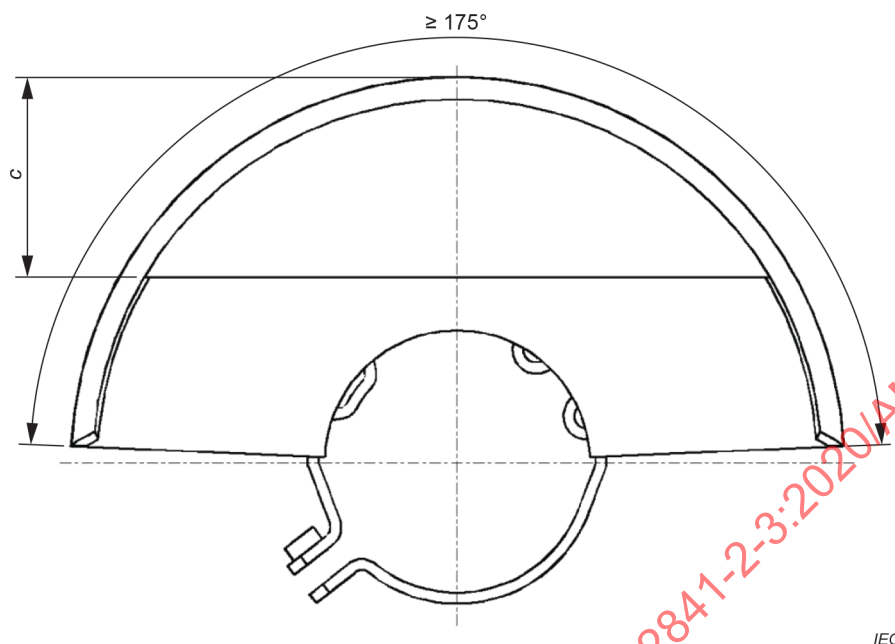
Wheel guard of Type B (grinding wheel guard)
